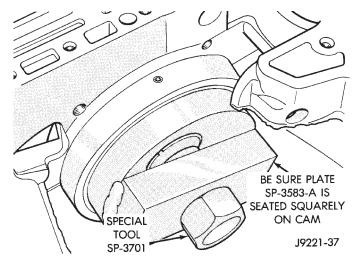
Positioning Puller Plate On Clutch Cam ward. The retainer and rollers will slip easily into the cam when properly positioned.
